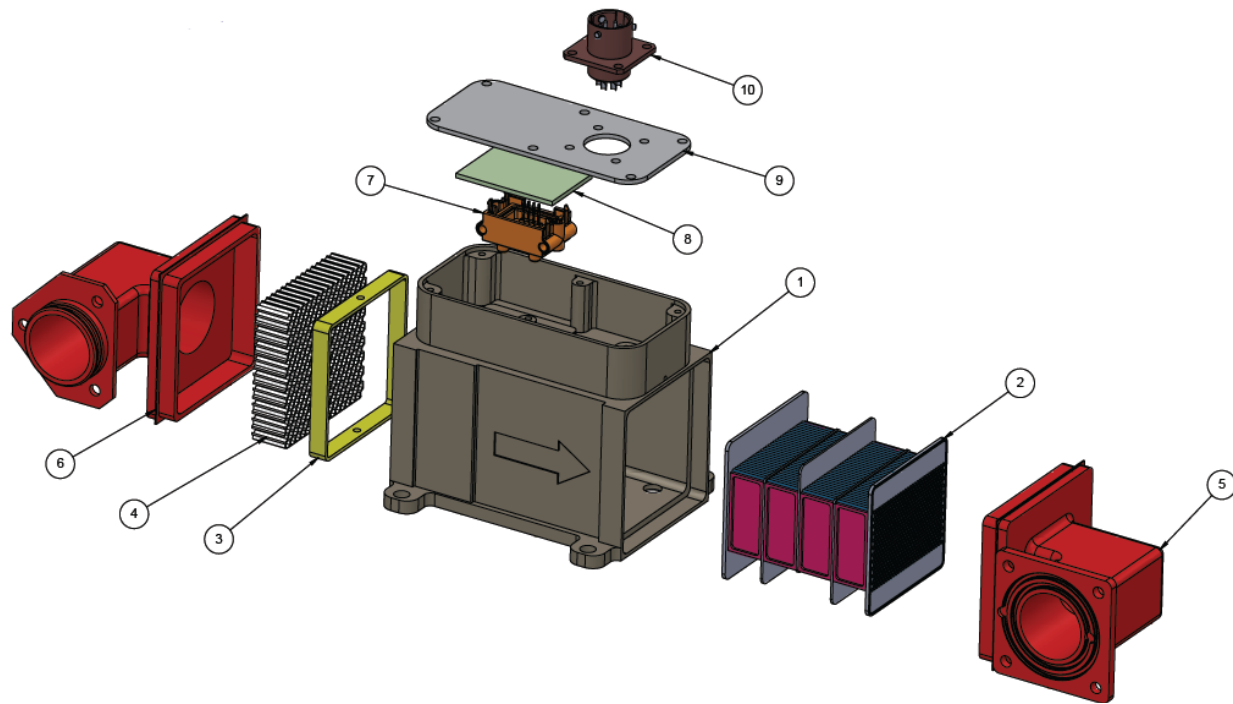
Assembled and exploded view of flight-like prototype FMHX.
